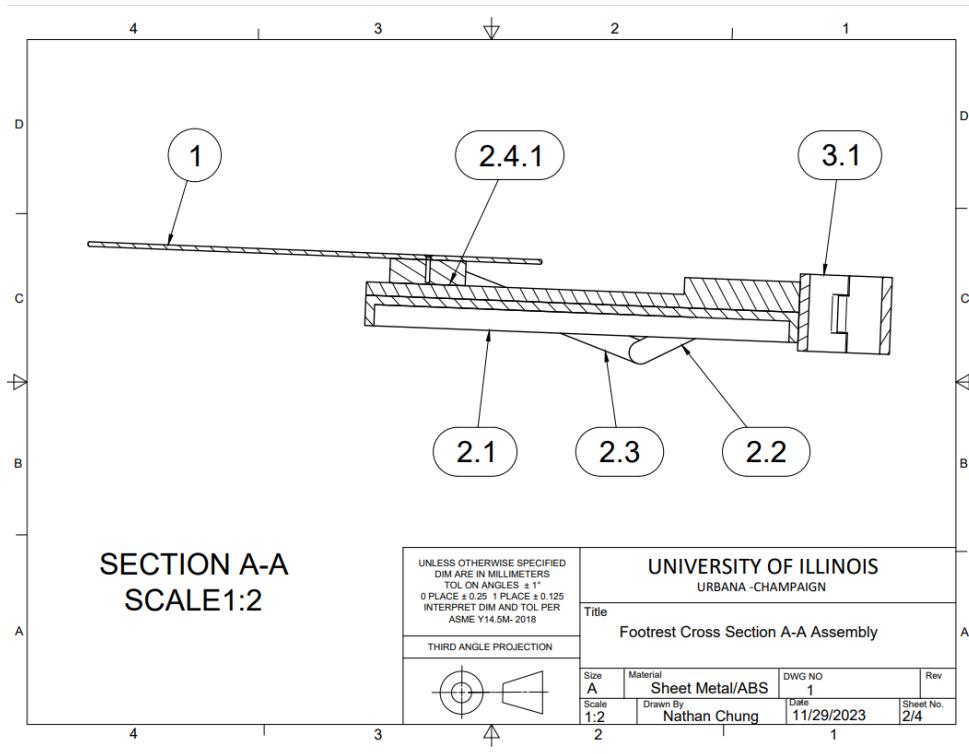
Footrest Cross Section Assembly Section A-A View Drawing
